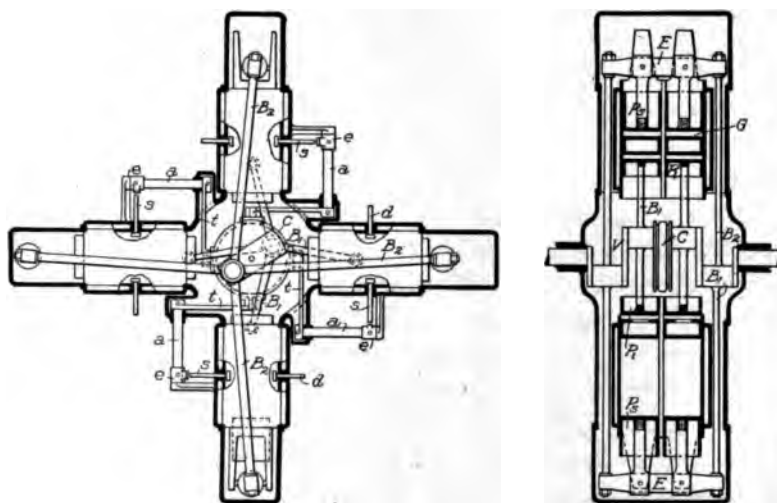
Side and Edge-On Sections of Gobron-Brillé Motor
